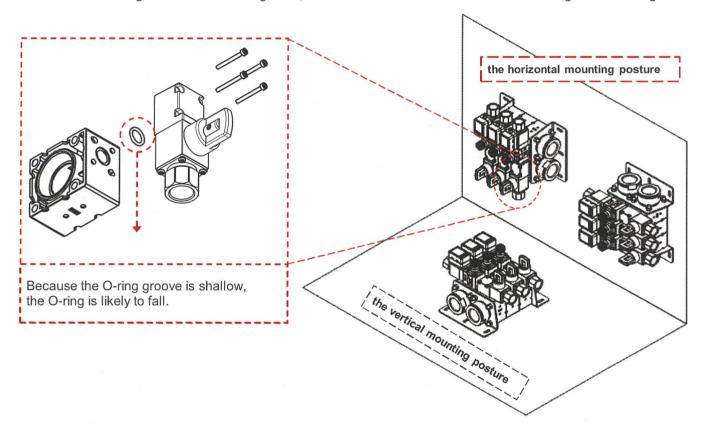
Fall of the O-ring in vertical manifold mounting posture
